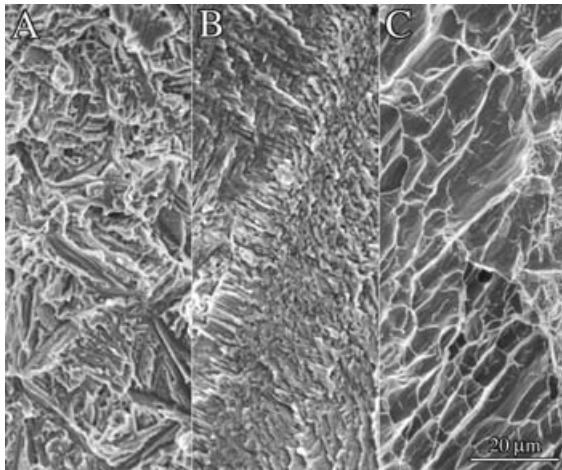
SEM micrographs of the fracture surfaces of CP Ti specimens. (A) laser welded with argon shielding; (B) laser welded without argon shielding; (C) control.
